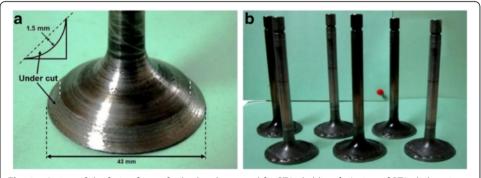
a A view of the faying faces of valve head prepared for PTA cladding; b A view of PTA clad engine valves prior to finishing
